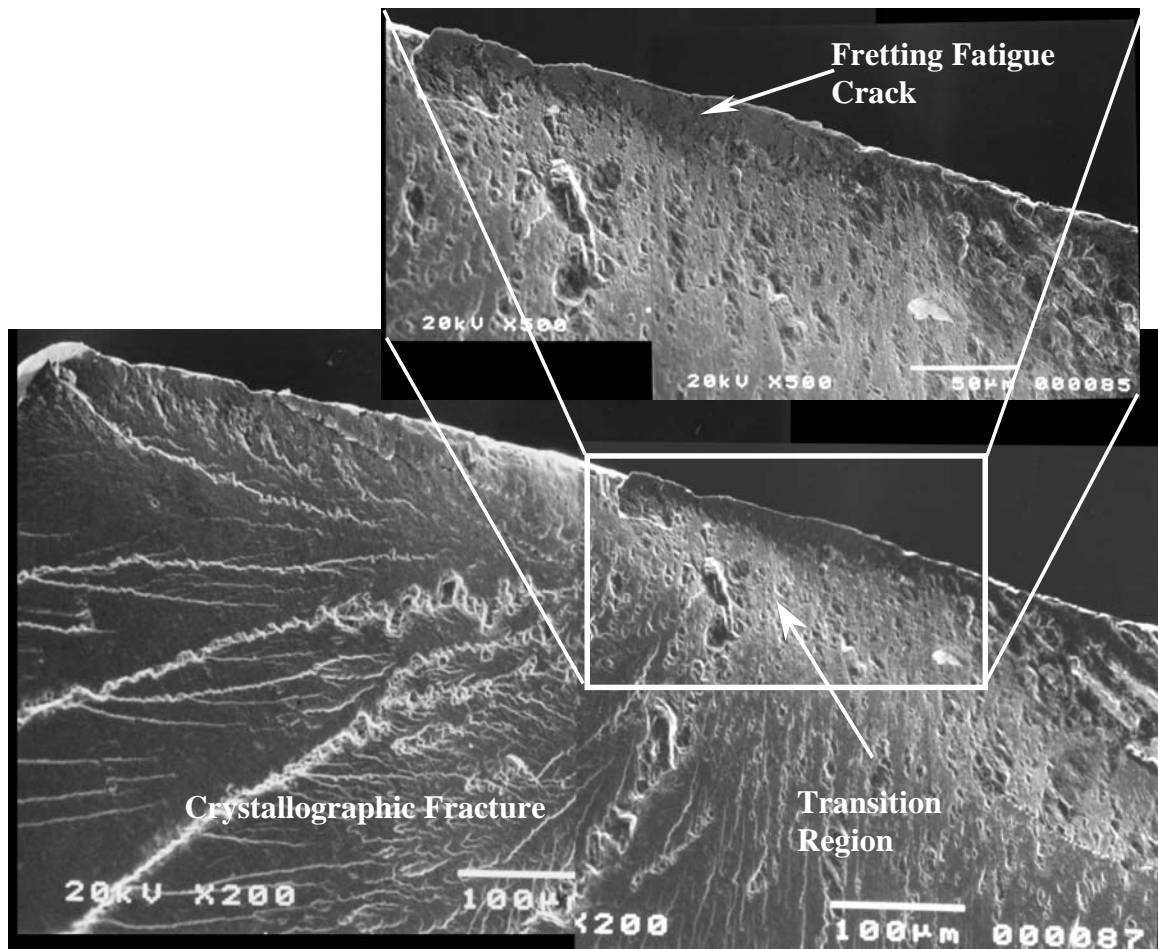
SEM fractographs of fretting fatigue crack in ZOKKA specimen.
